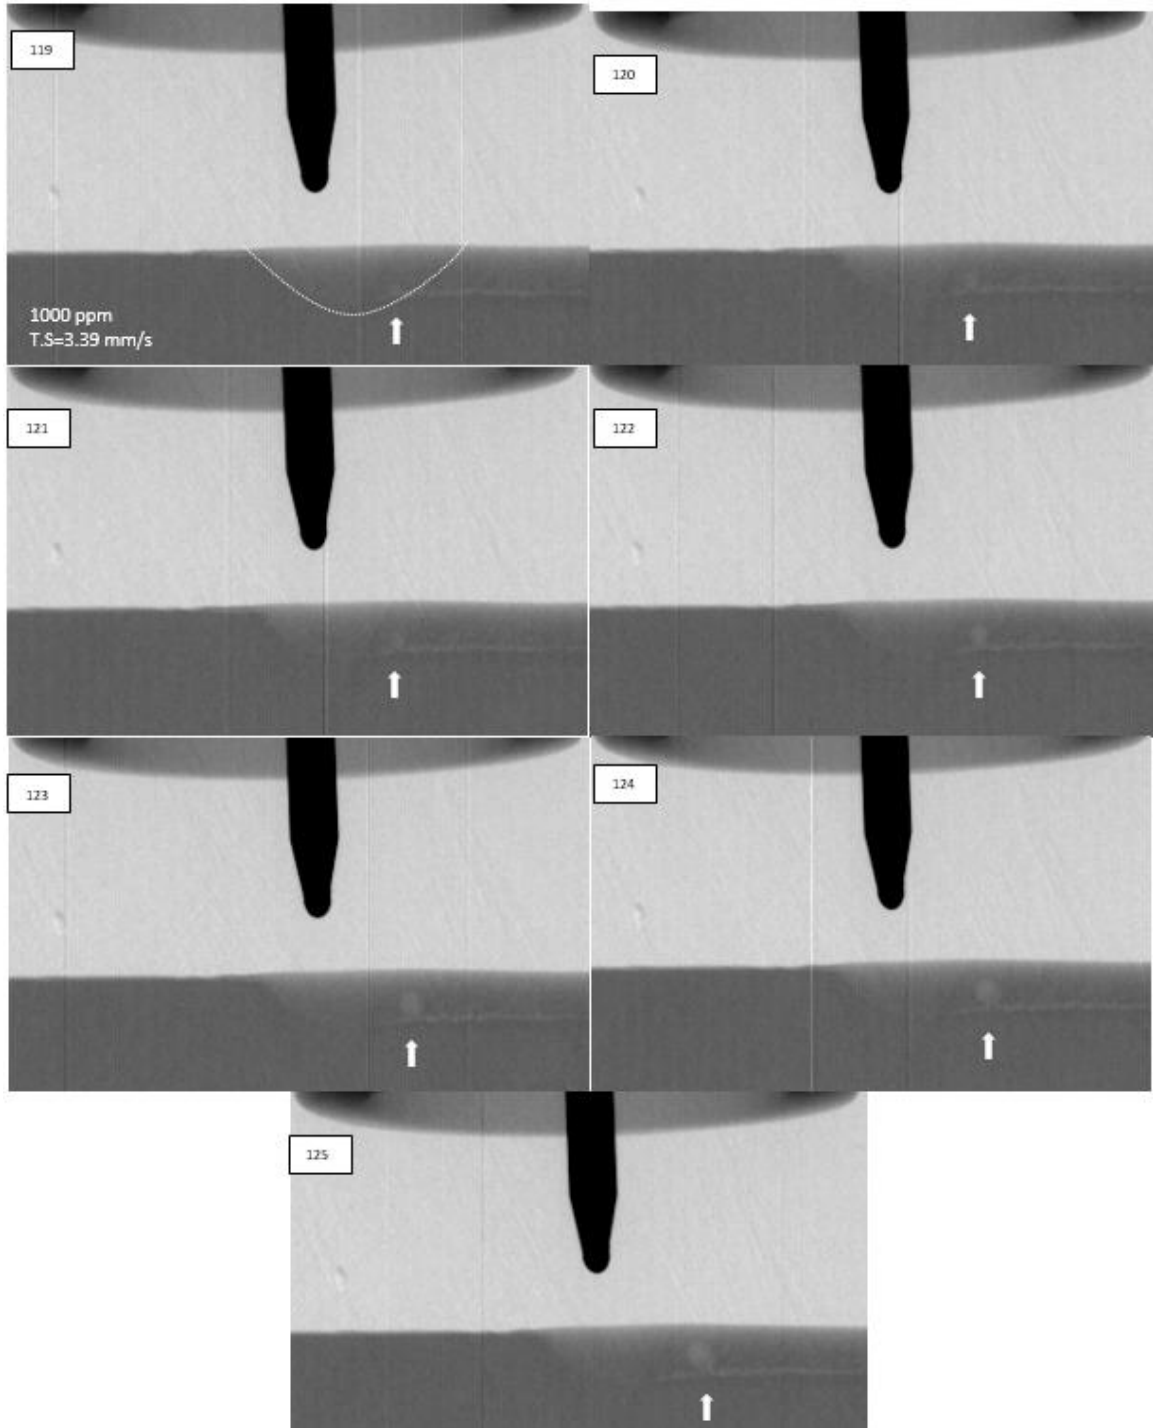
Alloy 1100 welded using 1000 ppm of shielding gas hydrogen at 3.39 mm/s.
